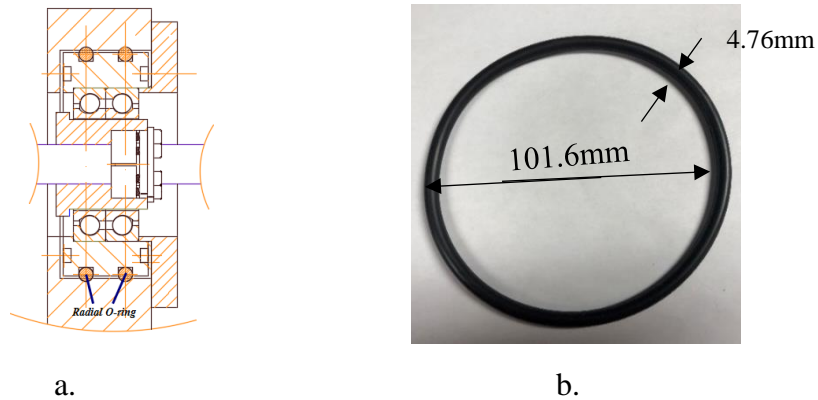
a. Drawing of the O-ring mount and b. photo of the O-ring
